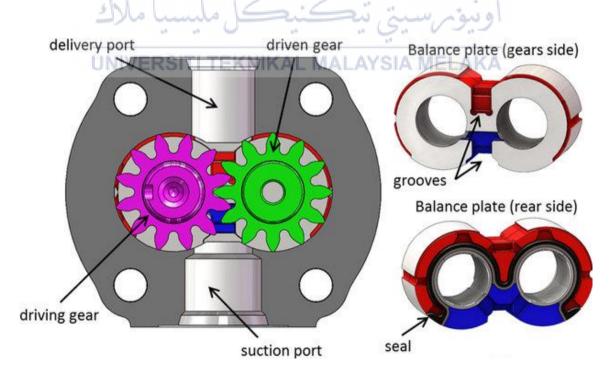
Example of an external gear pump system by Massimo Rundo
